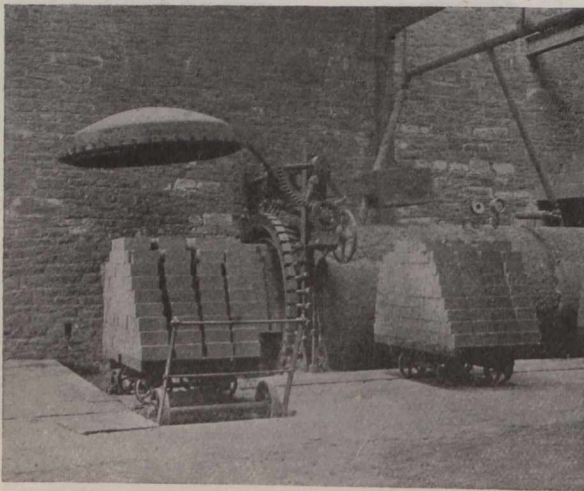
Hardening Chamber End, Showing Door Opening Arrangement.
